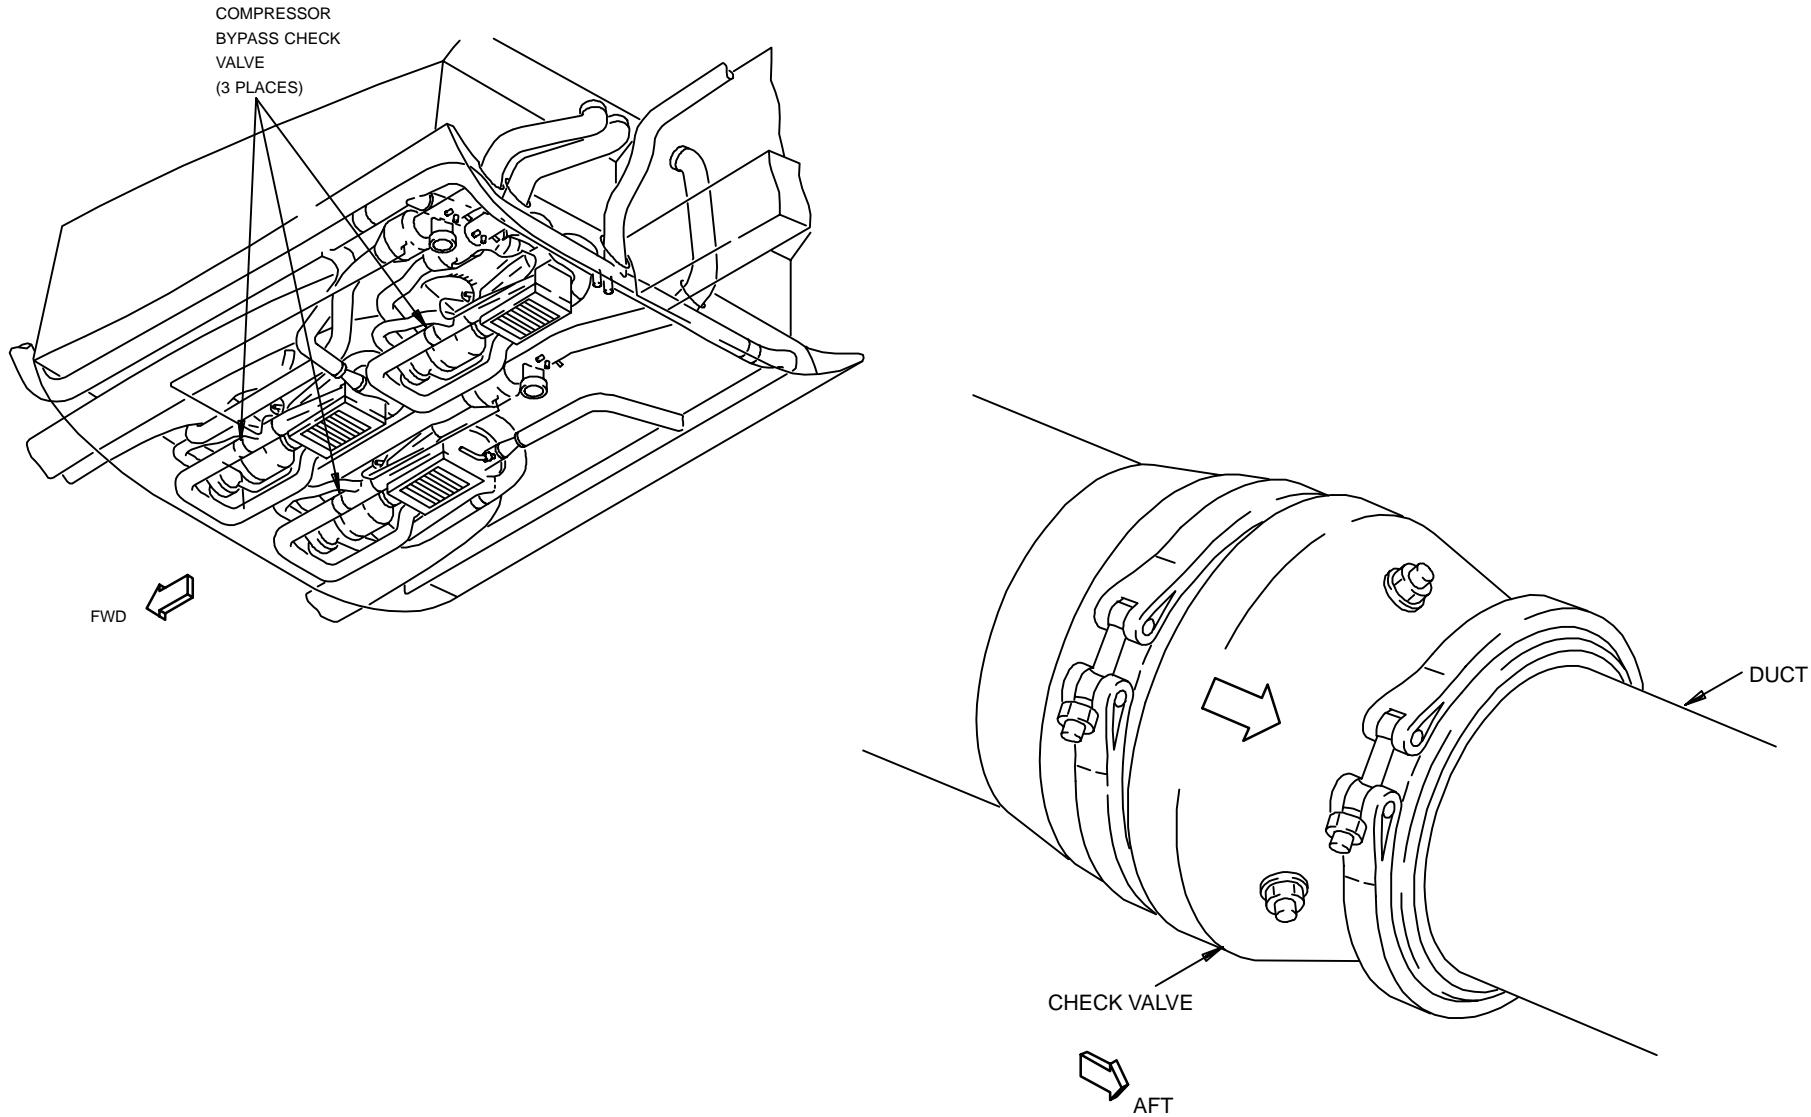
COMPRESSOR BYPASS CHECK VALVE
